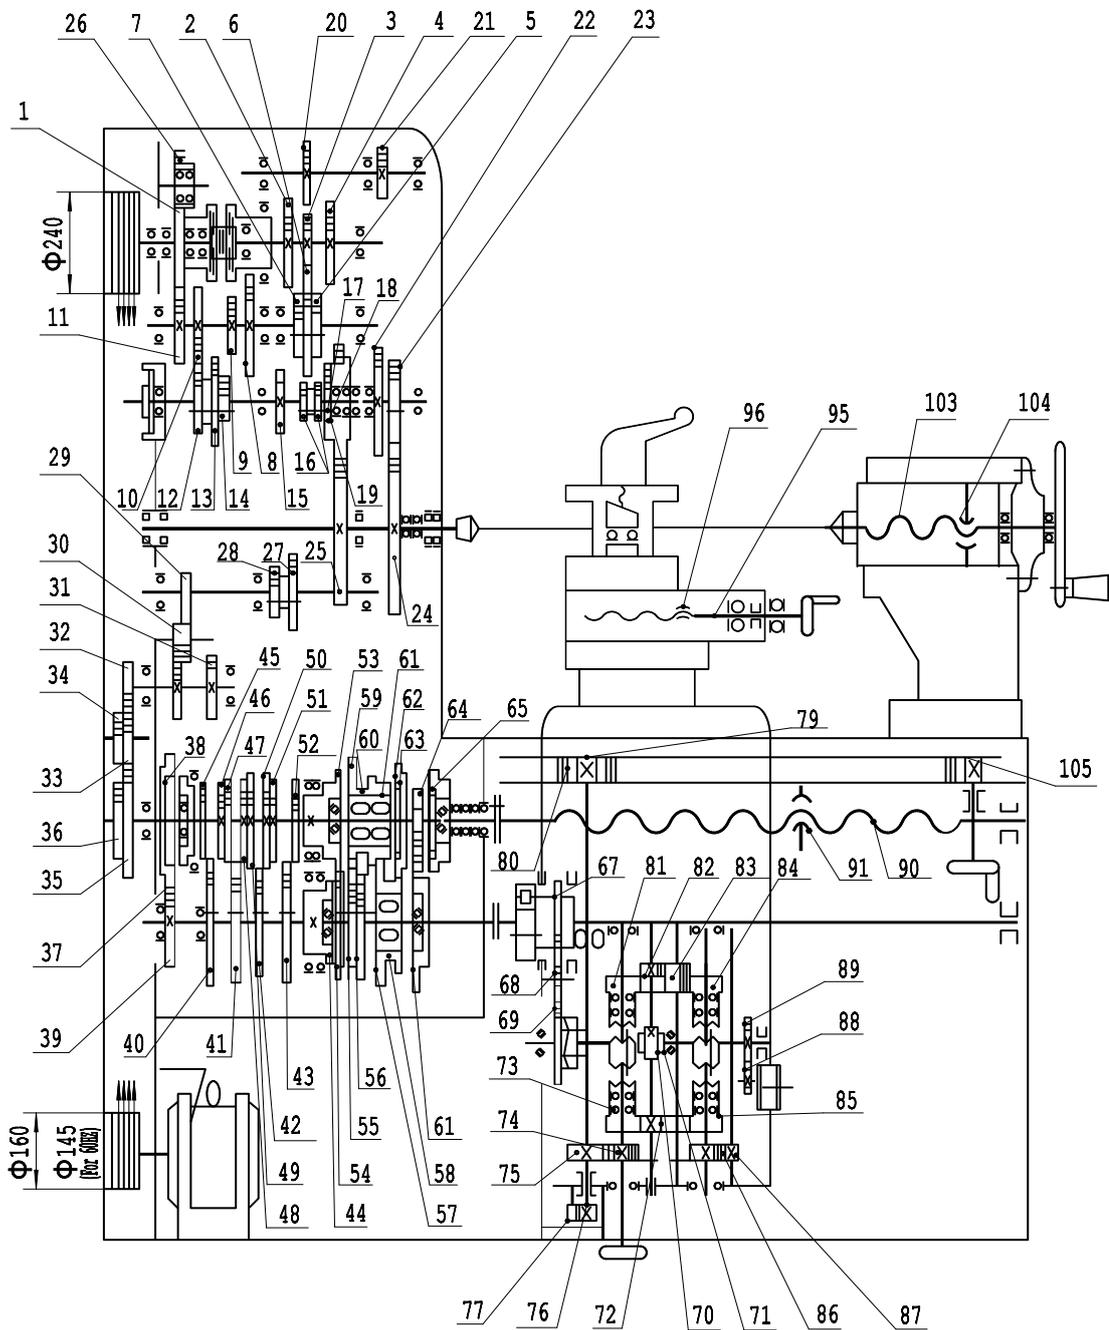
Arrangement of rolling bearings for CW63C, CW93C
